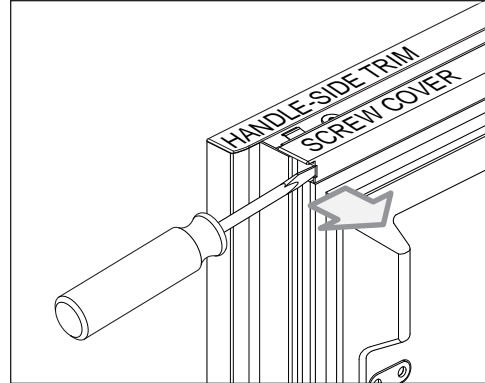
B. Screw Cover Removal with Handle-Side Trim
